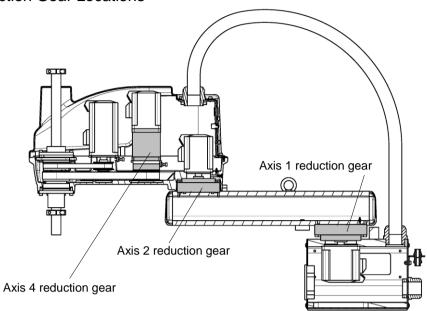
Reduction gear locations (KHL-500, KHL-600, KHL-700)
